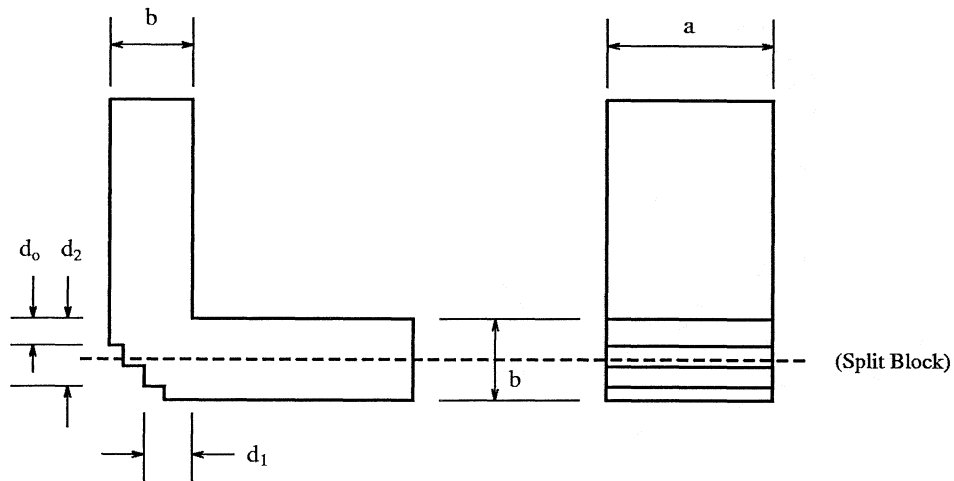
Three-Step Right-Angle E-Plane Bend Geometry.
